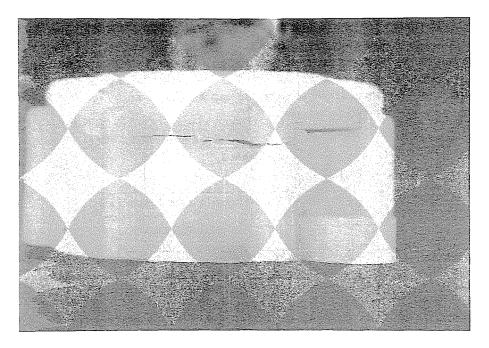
Photo of a damaged plastic cap manufactured with thread profile B
